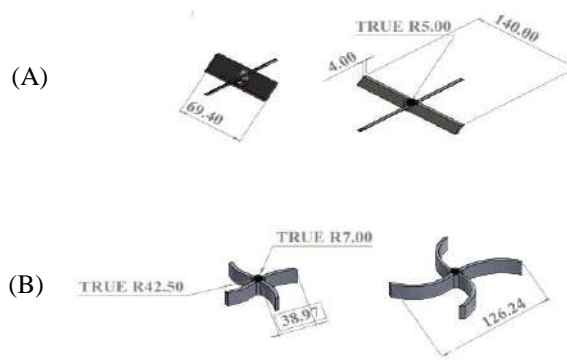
The designed impeller blades, (a) pitch-blade (b) open blade
